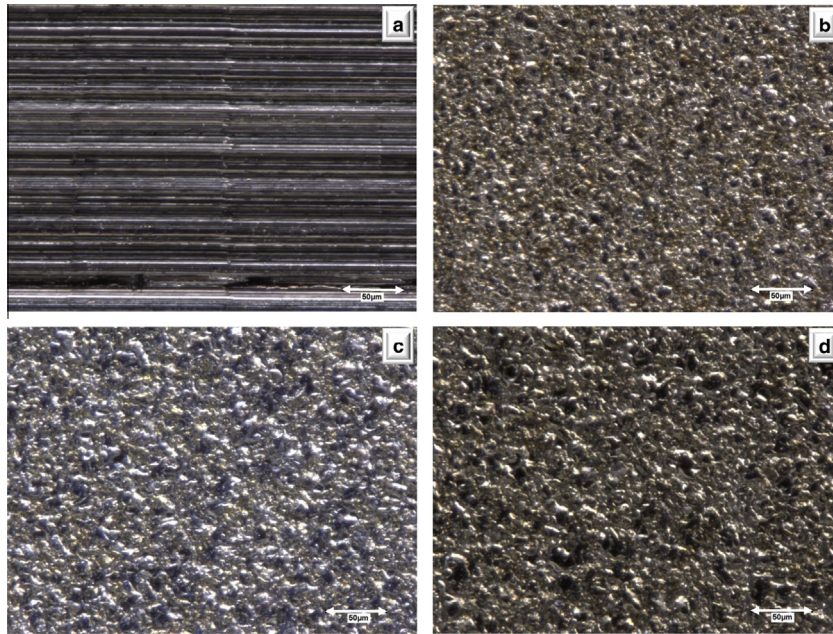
Optical microscopy (1000 $\times$ ) of specimen test surfaces conventionally machined (a), and EDM processed by shops #1 (b), #2 (c) and #3 (d).
